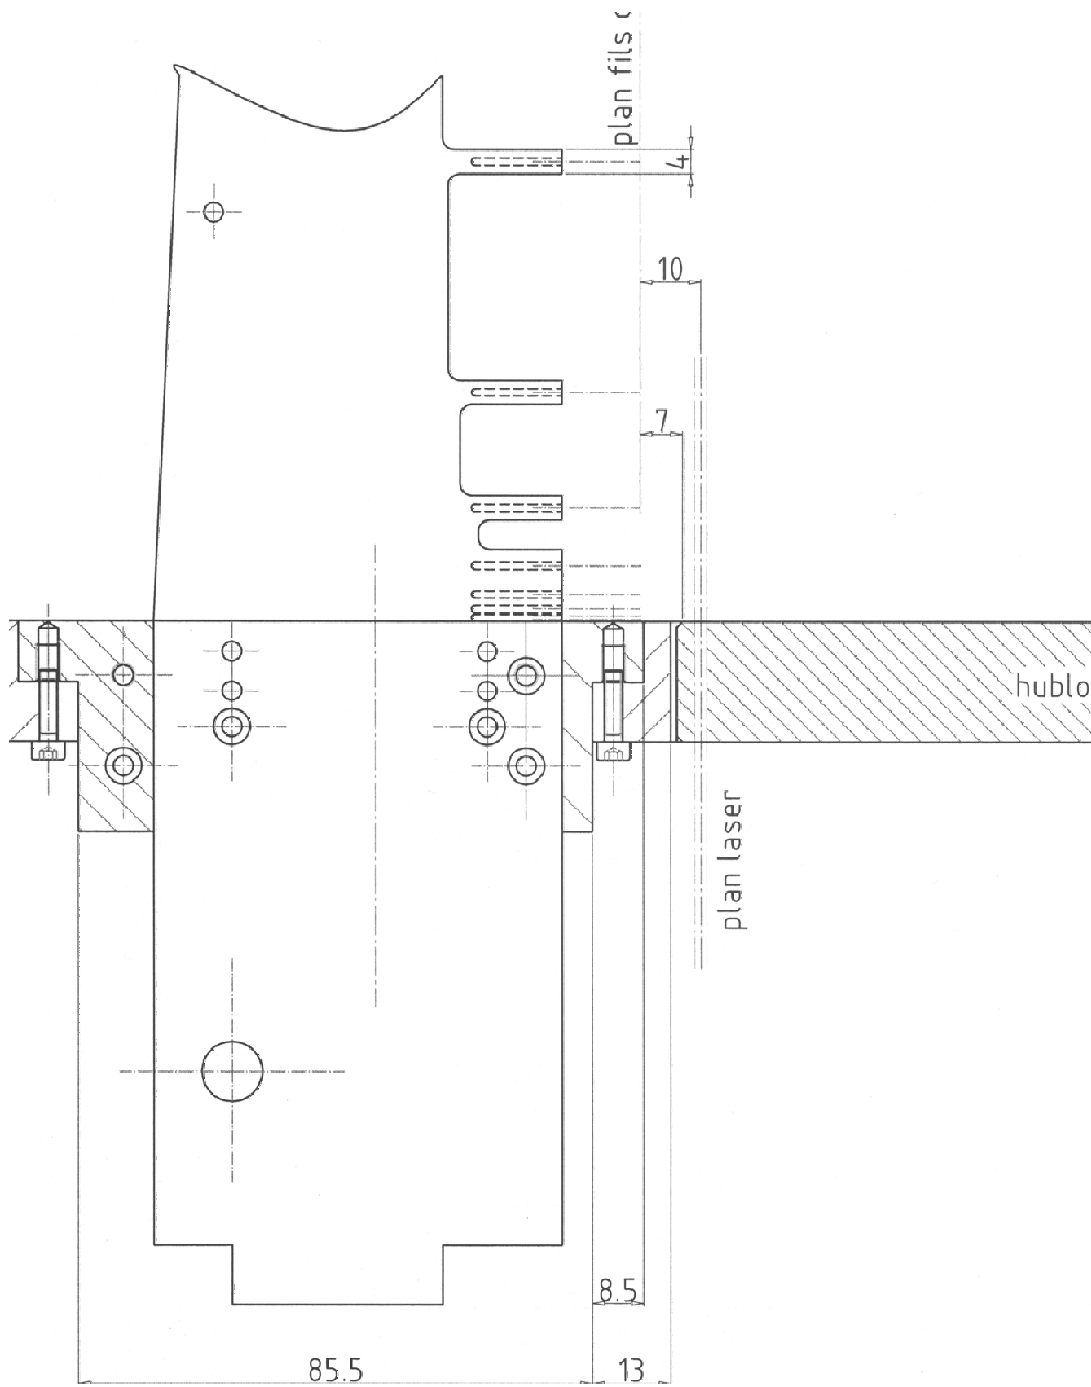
Attachment of the hot-wire rake to the tunnel wall. All dimensions are in mm.
